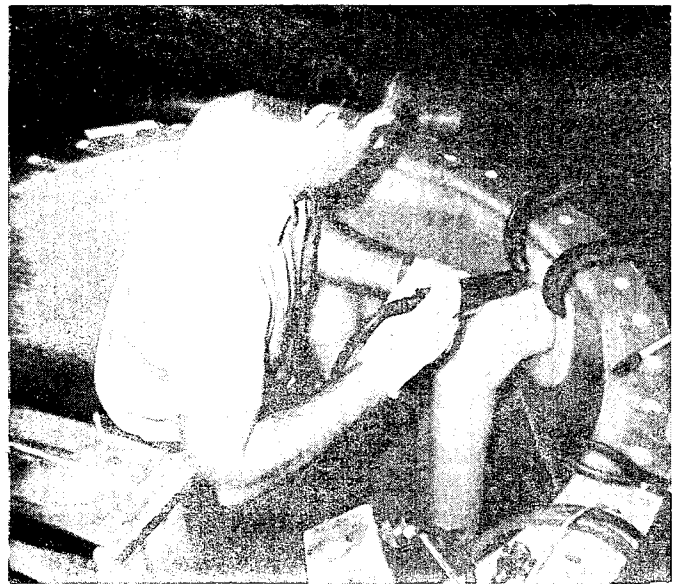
Welding KYNAR laminate flanged pipe inside large vessel.
